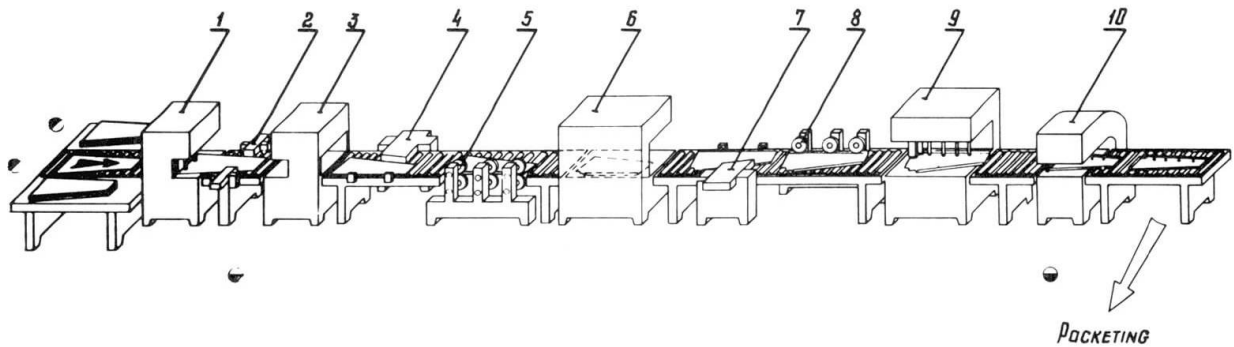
Lay-out of flow line for roof sheets fabrication. 1 - edge cutting and hole-punching press; 2 - member positioning device; 3 - cutting press; 4 - right-side corrugation machine; 5 - member positioning device; 6 - angle-cutting and hole-punching press; 7 - member repositioning and orientation device; 8 - left-side corrugation machine; 9 - angle-cutting and hole-punching press; 10 - eaves bending press.
